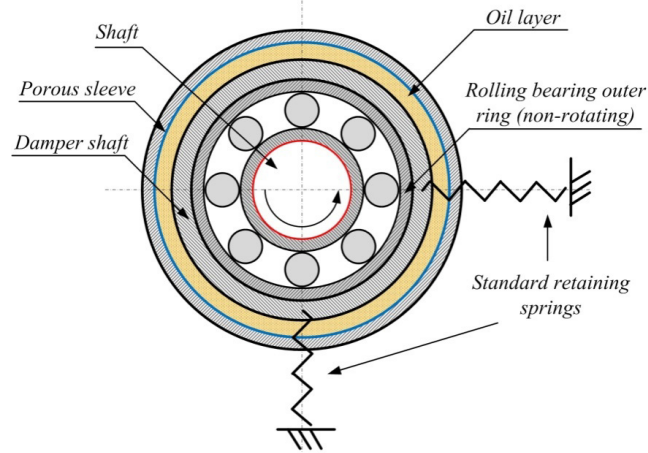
The scheme of a damper with a compressed oil layer and porous race
